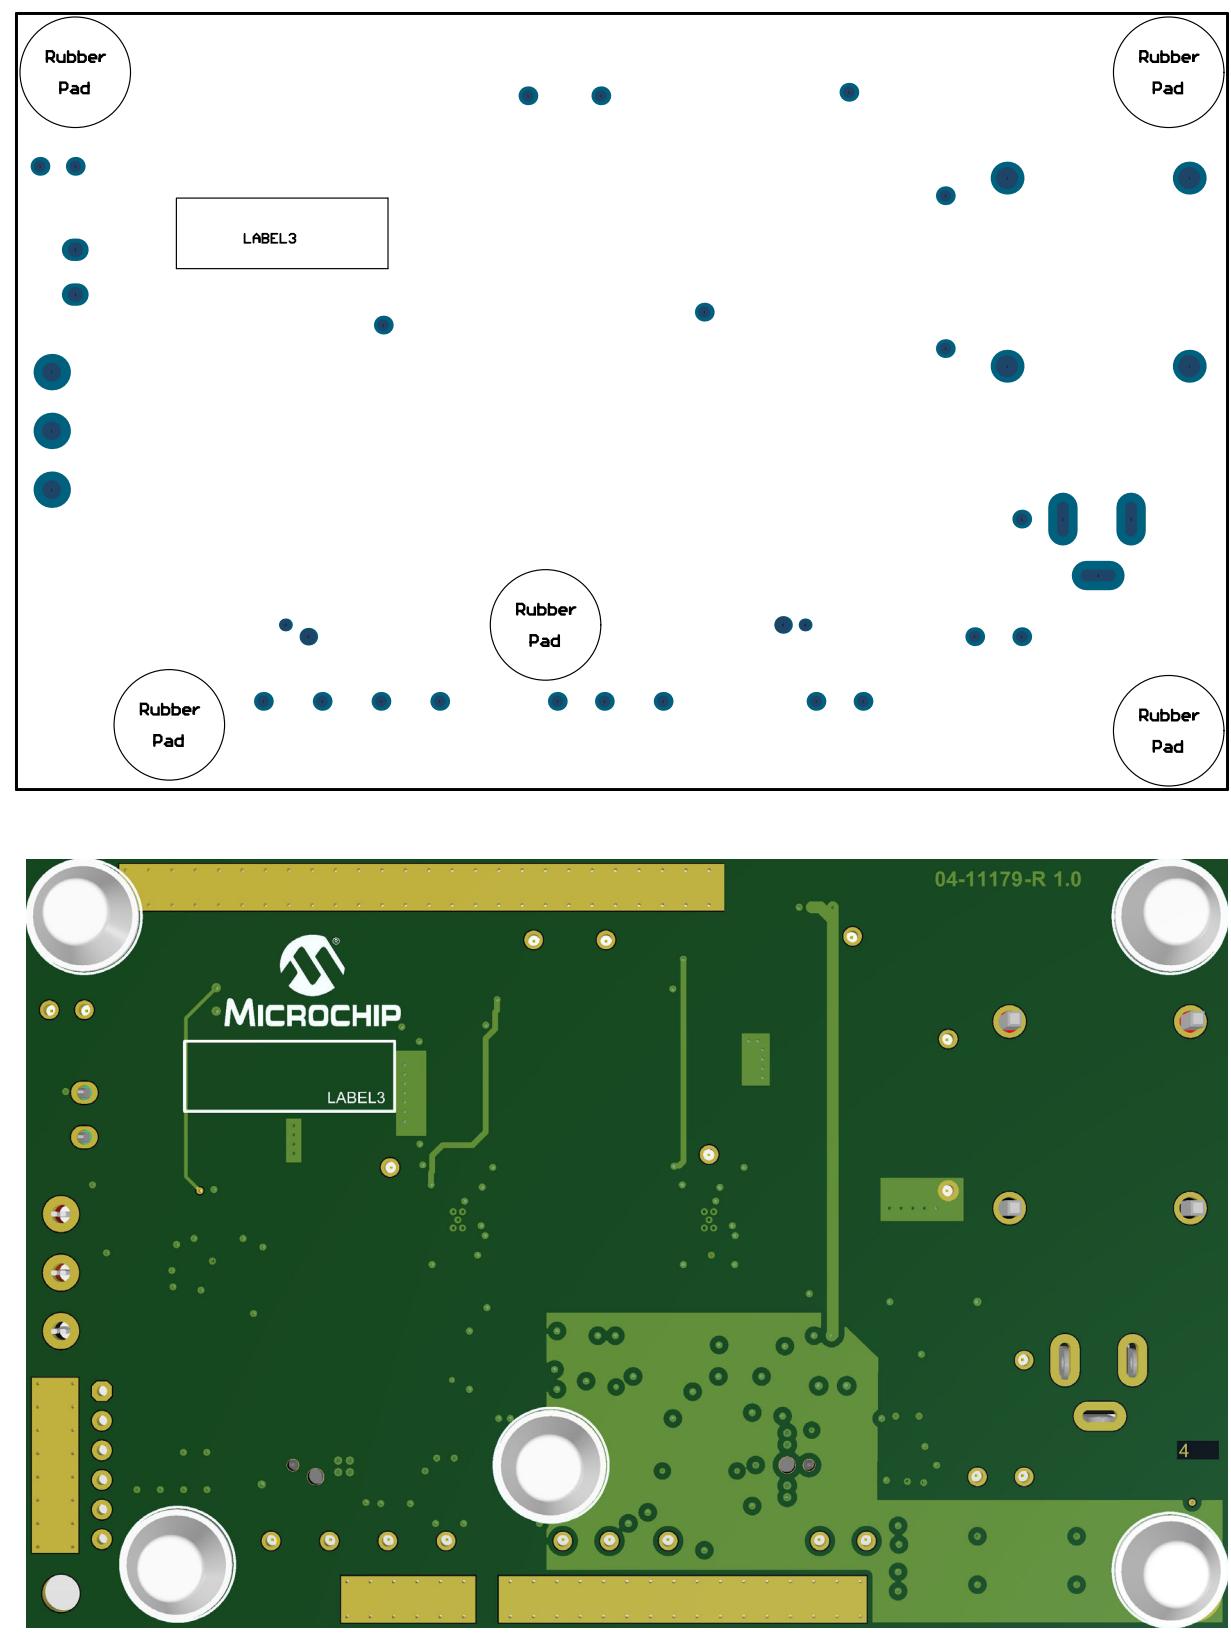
FOUR-SWITCH BUCK-BOOST DEVELOPMENT BOARD PCB BOTTOM ASSEMBLY
